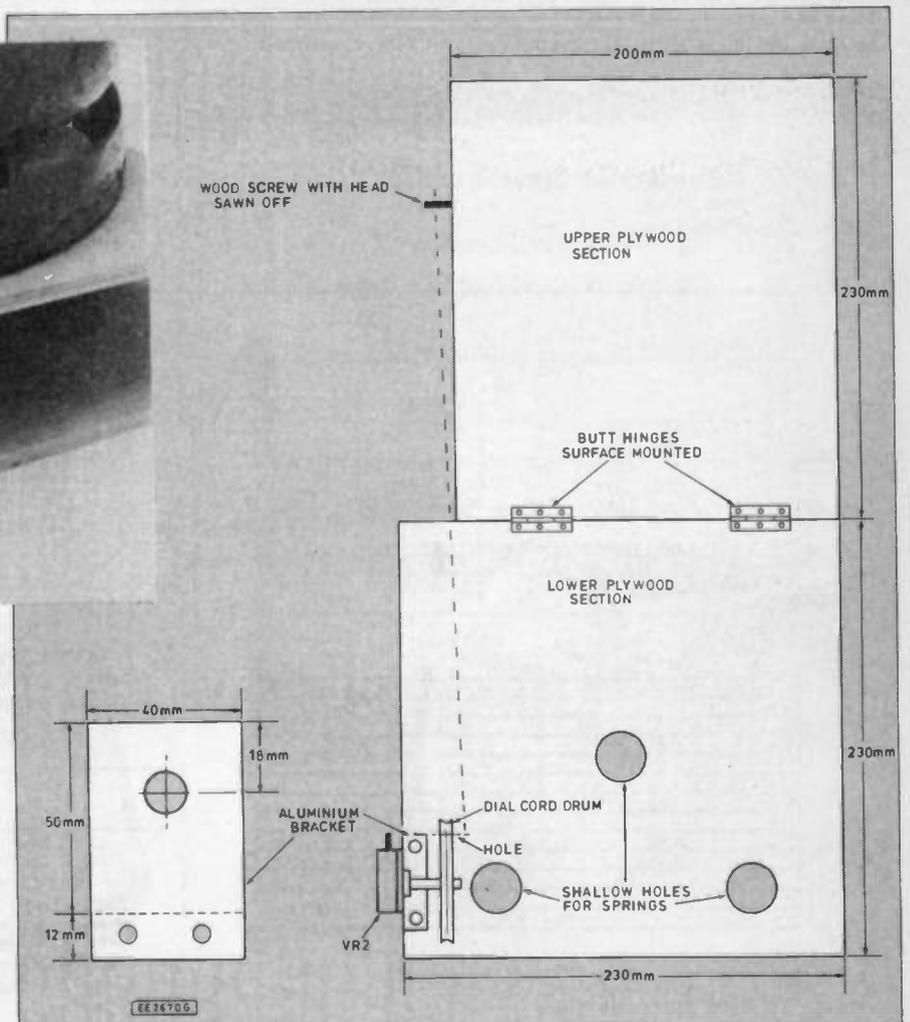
Construction details for the plywood sensor platform and the small aluminium potentiometer mounting bracket.
